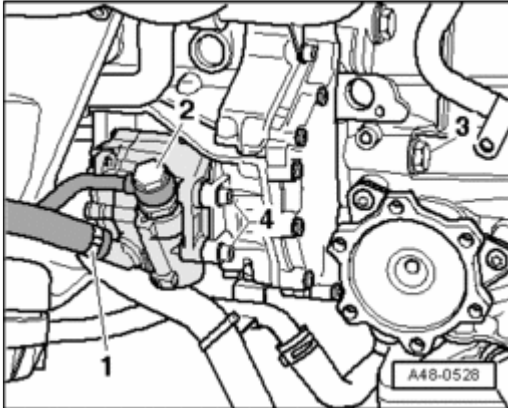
Clamping Sleeve From Suction Hose & Pressure Line
